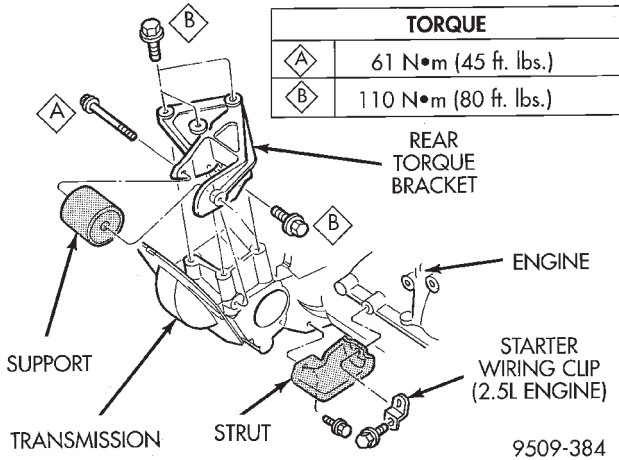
Engine Mounting—Rear 2.4 and 2.5L
